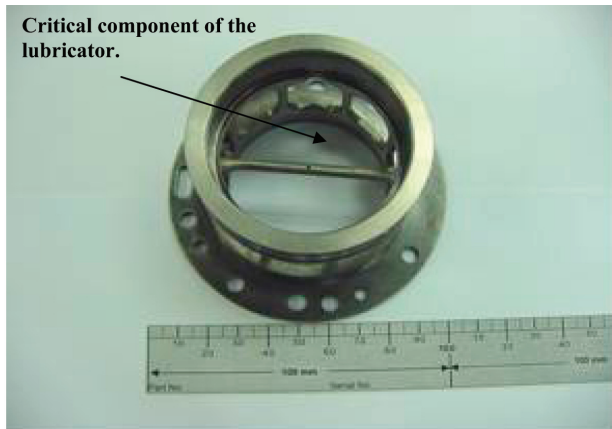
(a) A photograph of a stainless steel helicopter engine lubricator
